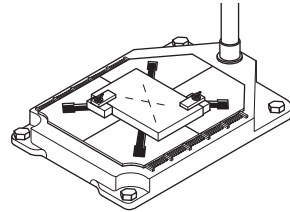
Workpiece Hold Downs Clamps (not supplied)
